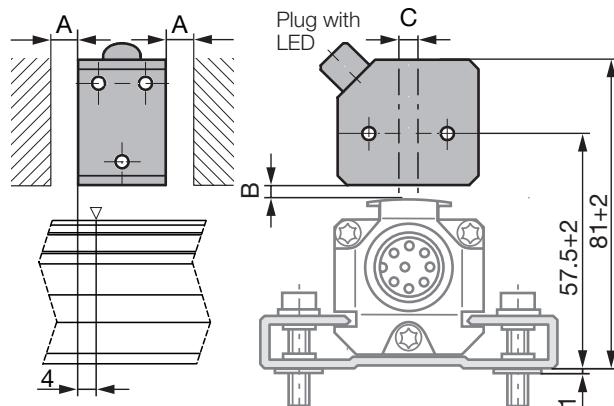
Dimensions and distances with BTL5-P-4500-1 electromagnet (24 V/100 mA)
